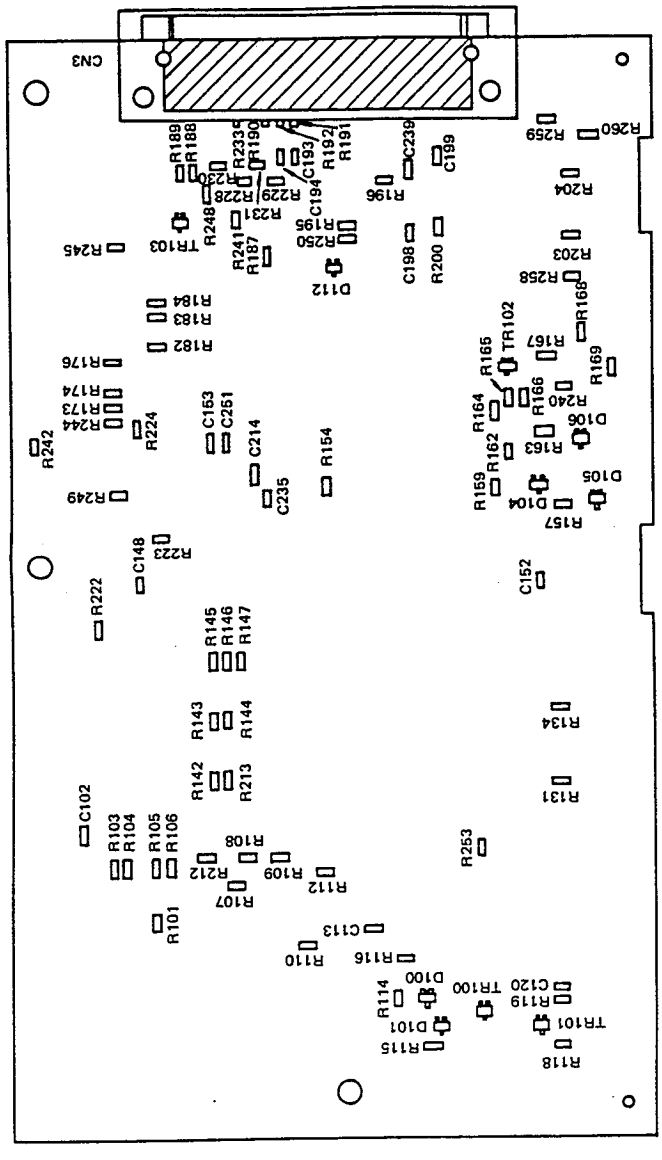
SLMC – 5 Printed-Circuit Board (4YA4021-1001Gxxx) 2/2 (4/4) (REV. 12, 13)
